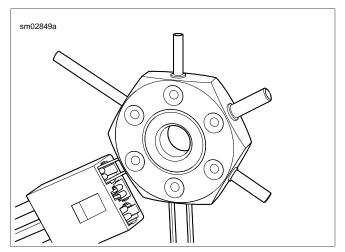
Removing Autofuse Unsealed Terminal from Ignition Switch
